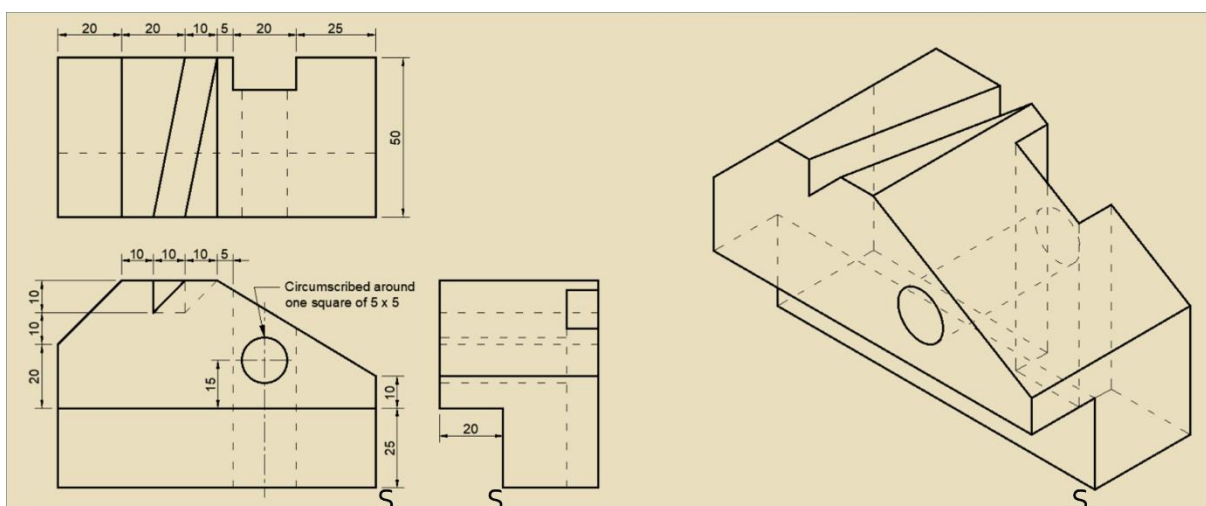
Third-angle orthographic multivIEWS and an isometric view of a machine casting
